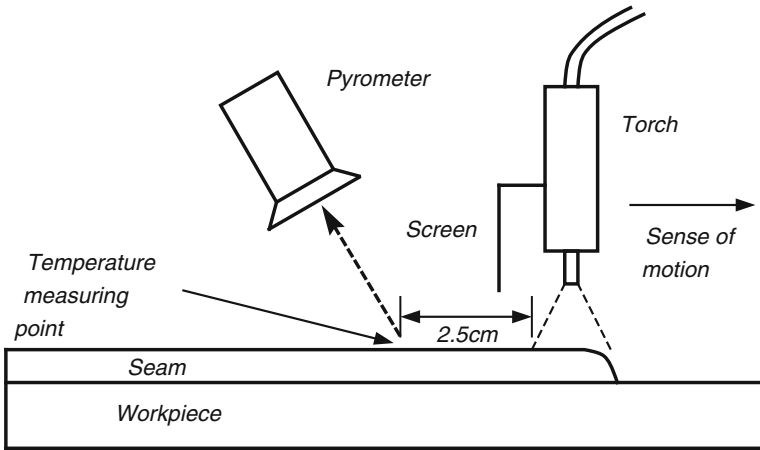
A schematic view of the welding machine apparatus
